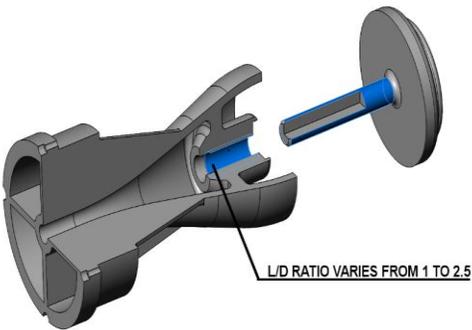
(a) Exploded View of Nozzle Ccheck Valve
